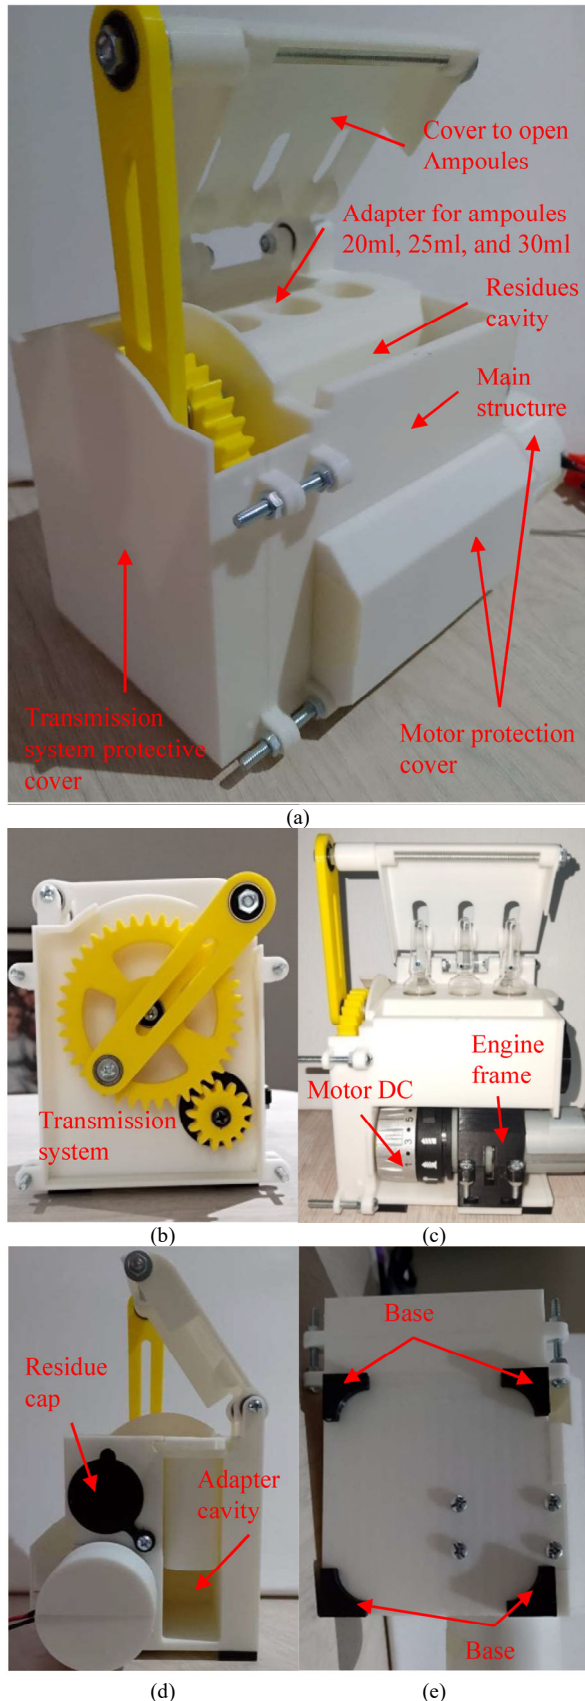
Construction of ampoule opening machine: (a) components; (b) transmission system; (c) motor; (d) cavities; and (e) base.
